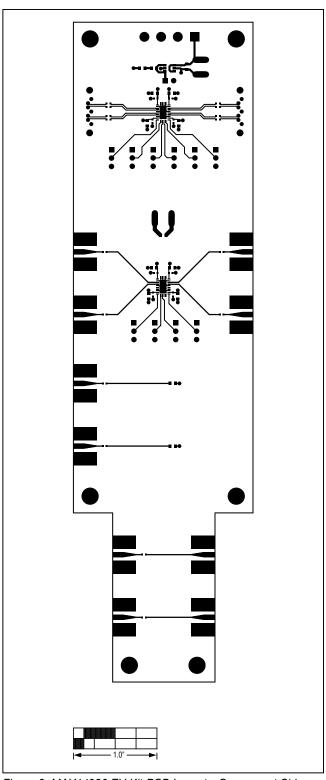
MAX14986 EV Kit PCB Layout—Component Side
